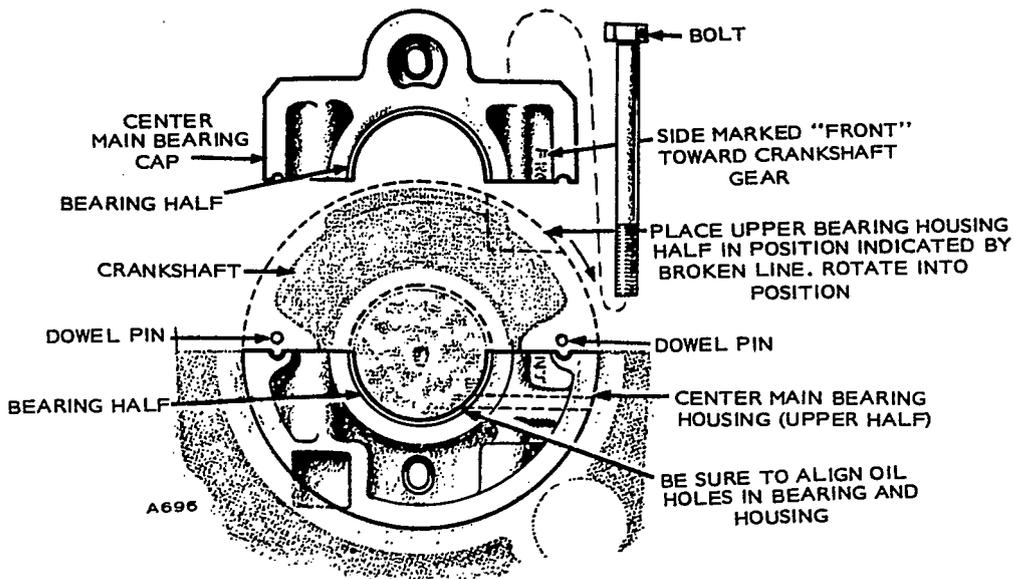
CENTER MAIN BEARING (FOUR CYLINDER ONLY)
